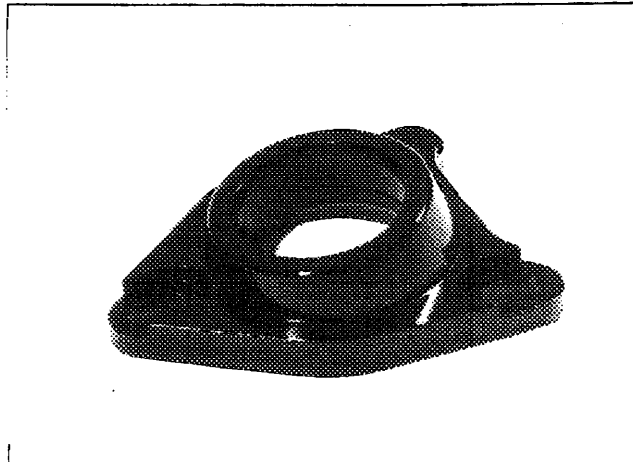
REAR REINFORCED TOP MOUNTING PLATES
